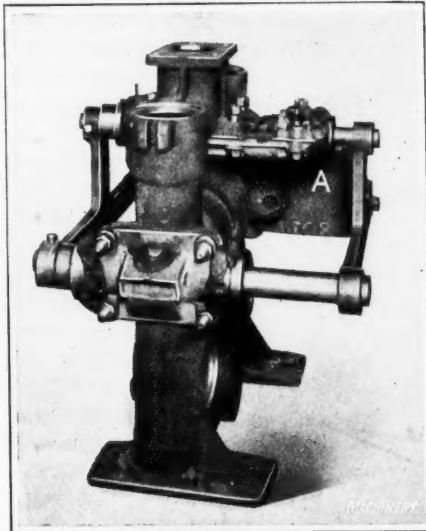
Babbitting Fixture for Gear and Pinion Shaft Bearings
